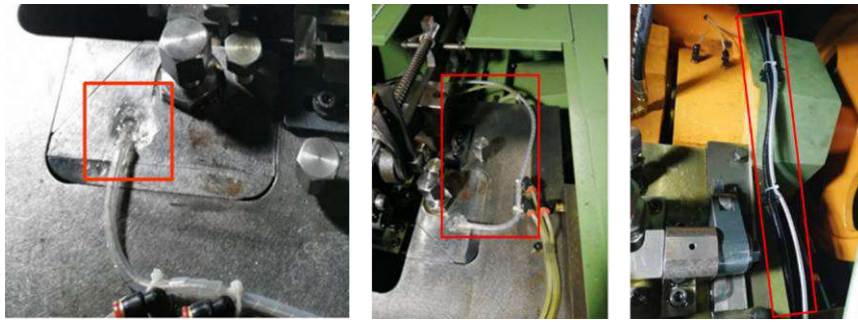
Reinforcement and Isolation at the Drilled Installation Site, Outer Wiring Protective Sleeve, and Cable Routing
